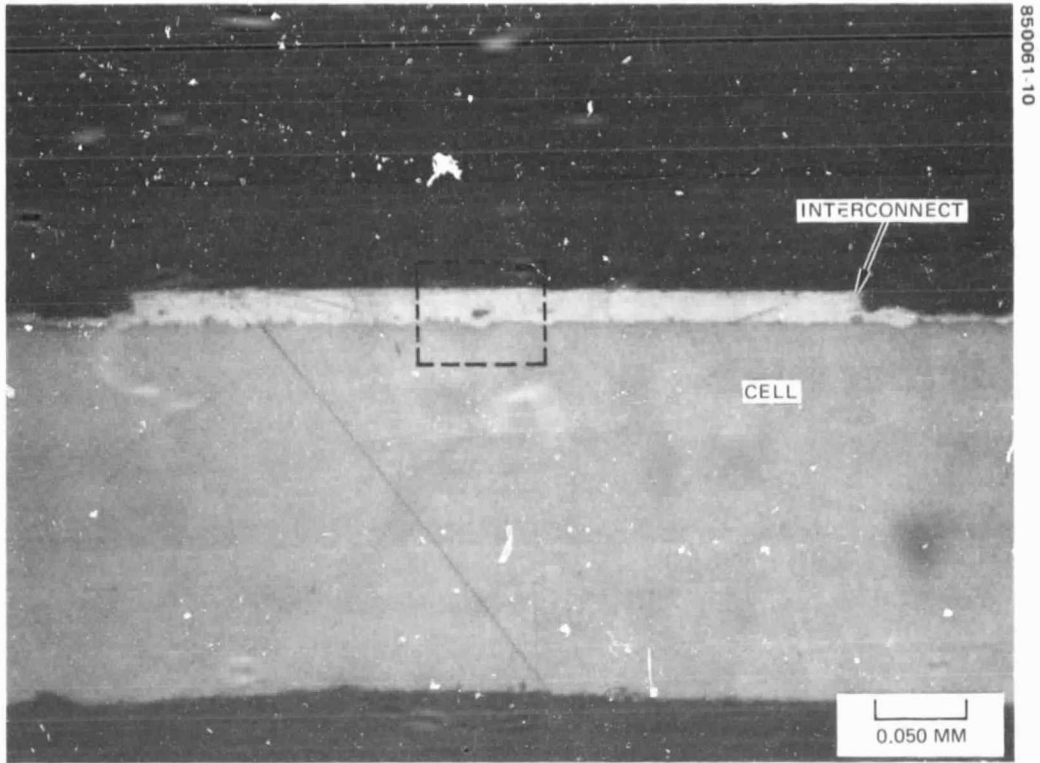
ULTRASONIC WELD CROSS SECTION
